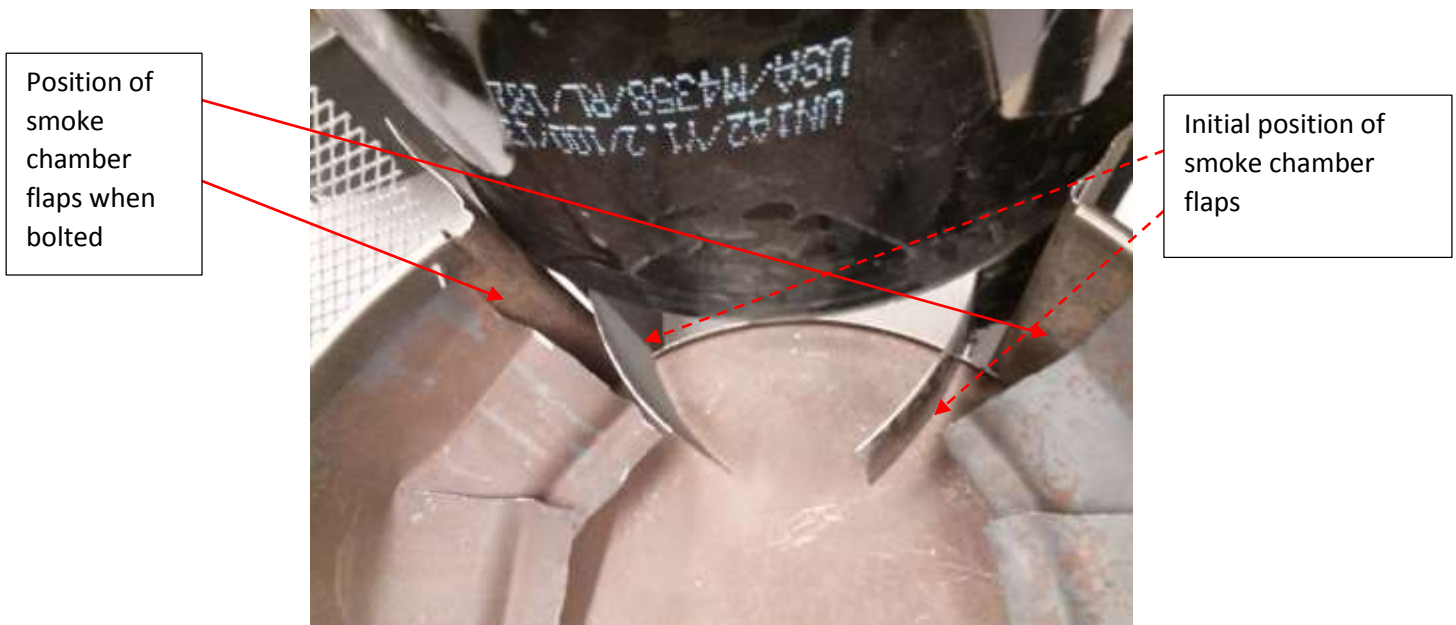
Smoking Chamber - Cooking Surface Mate Detail (Before Bolting)
